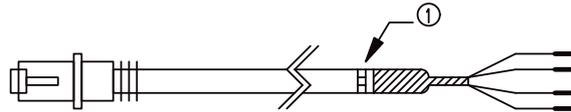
The cable should preferably be fixed in place using a cable tie (1)
